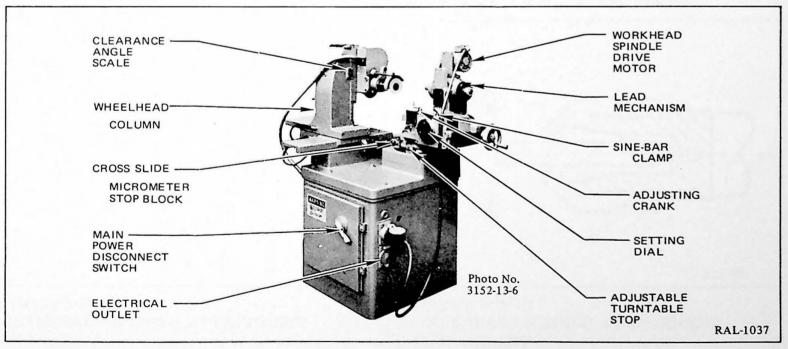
MACHINE NOMENCLATURE - REAR VIEW
